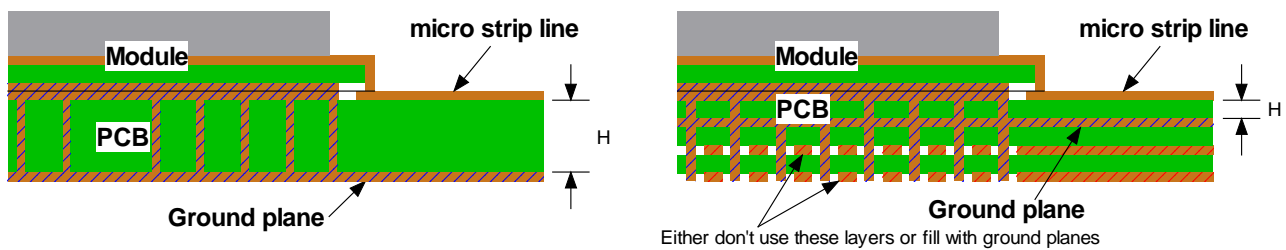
PCB build-up for micro strip line. Left: 2-layer PCB, right: 4-layer PCB
